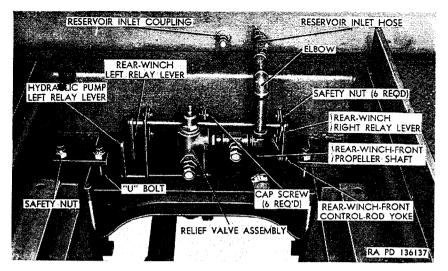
Rear view of forward end of wrecker body with crane removed M62.
